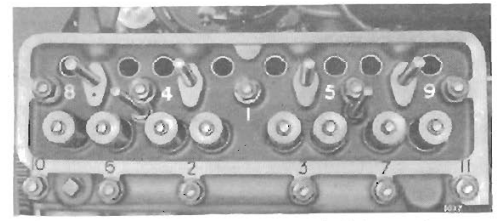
Herald 1200, 12/50 and Spitfire cylinder head nut tightening sequence
